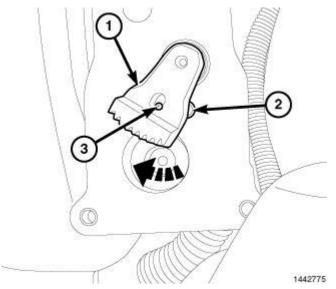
Selector Gear - Rearward Position, Bearing Housing Alignment Hole & Selector Gear
